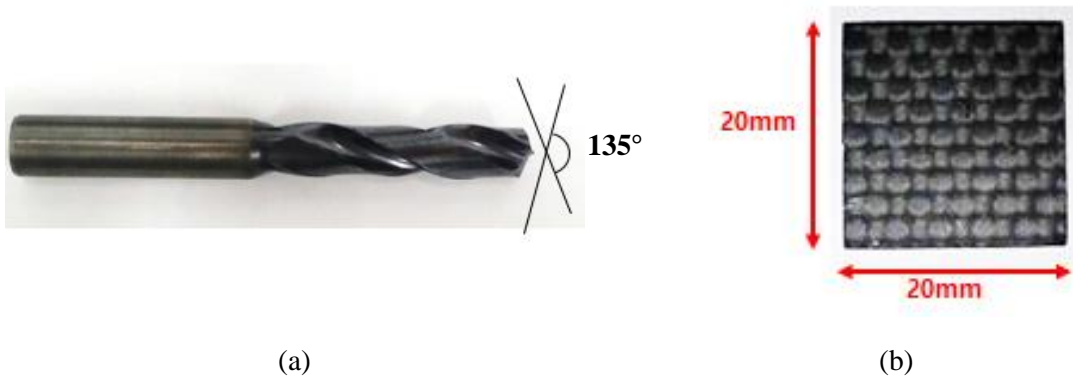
(a) drill bit (b) fabric CFRP specimen for CFRP drilling
